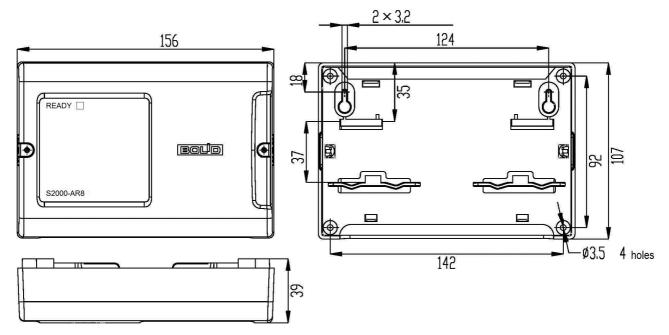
Overall and Mounting Dimensions of S2000-AR8
